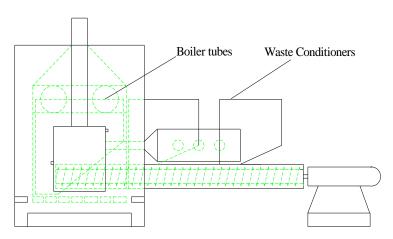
SIDE VIEW OF MSW STEAM BOILER
